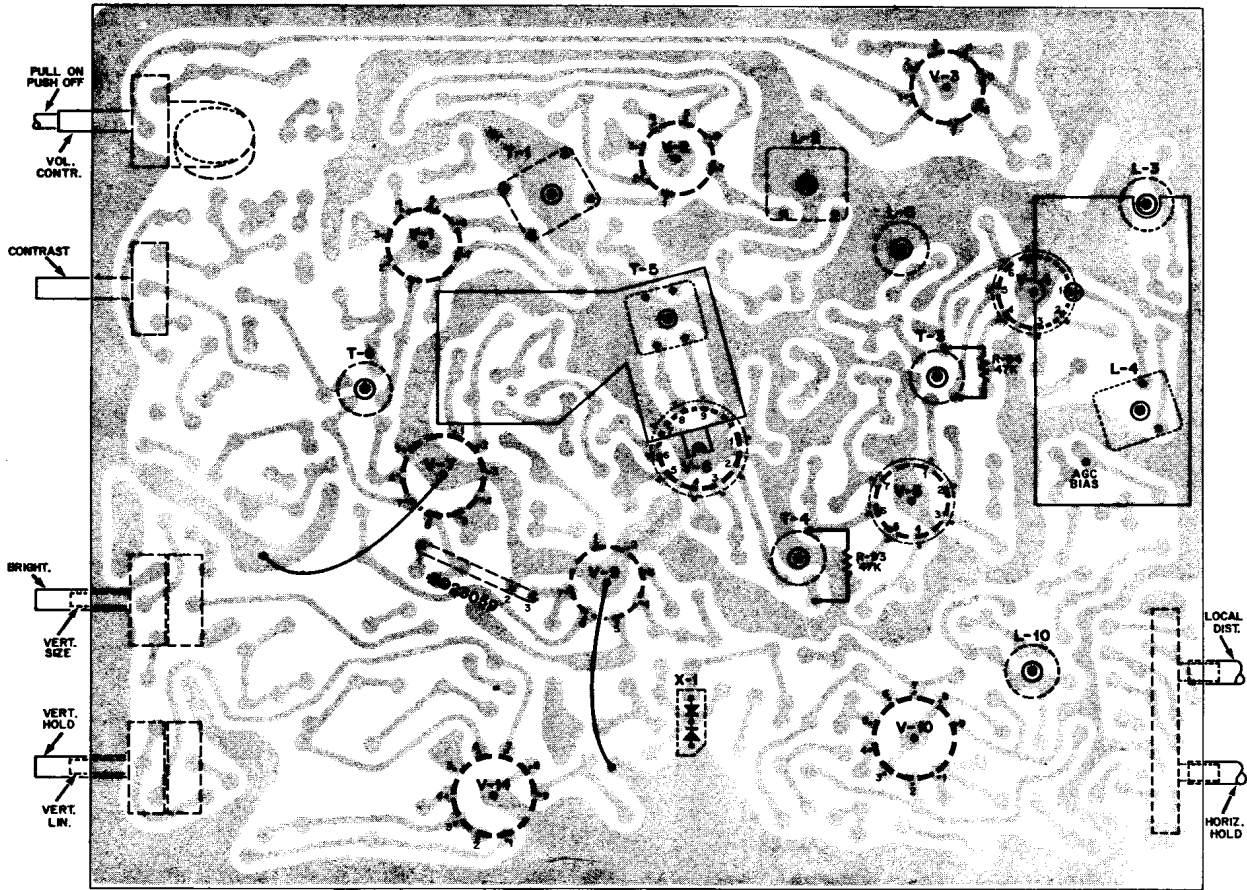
ETCHED PRINTED CIRCUIT BOARD CHASSIS (BOTTOM VIEW)
